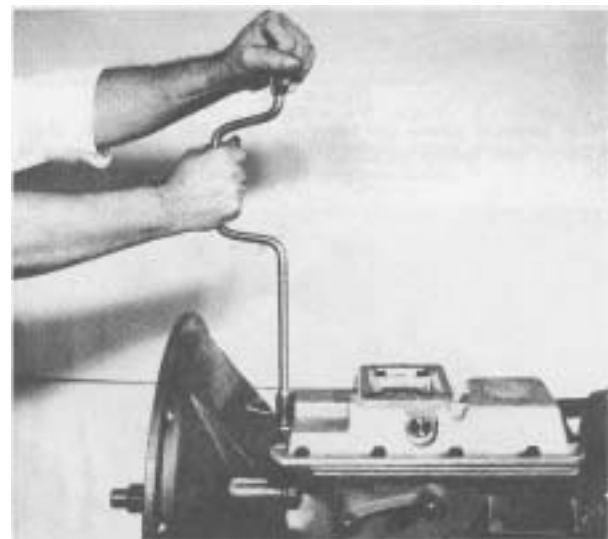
Remove remote control or shift tower from control cover. Remove control cover capscrew and lock-washers.
